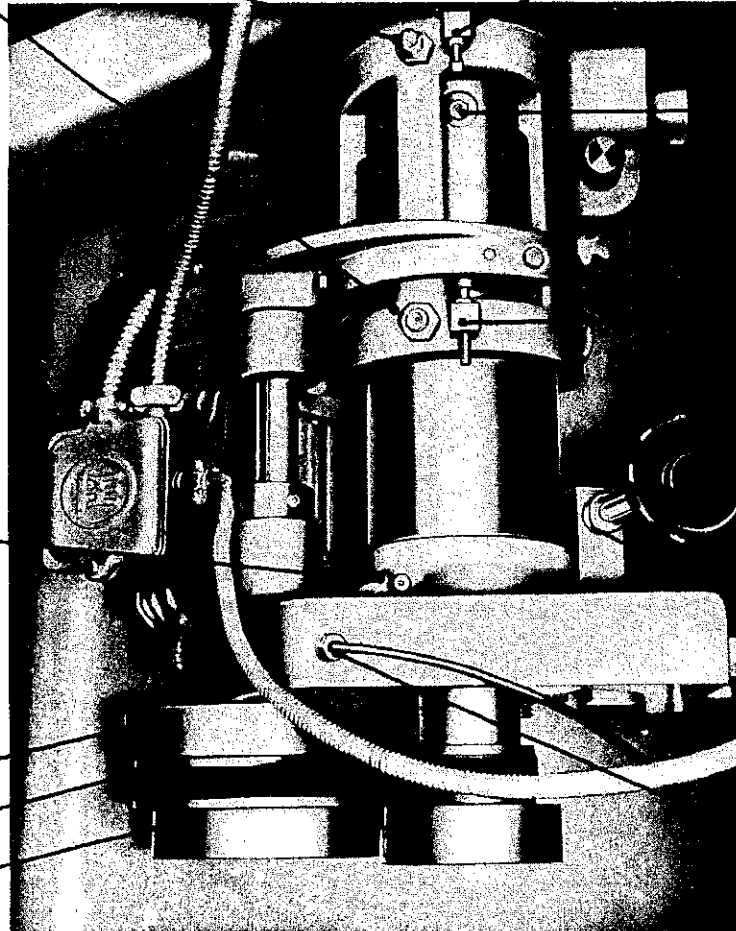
FRONT VIEW OF VERTICAL SPINDLE MOULDER TYPE B. E. N.
